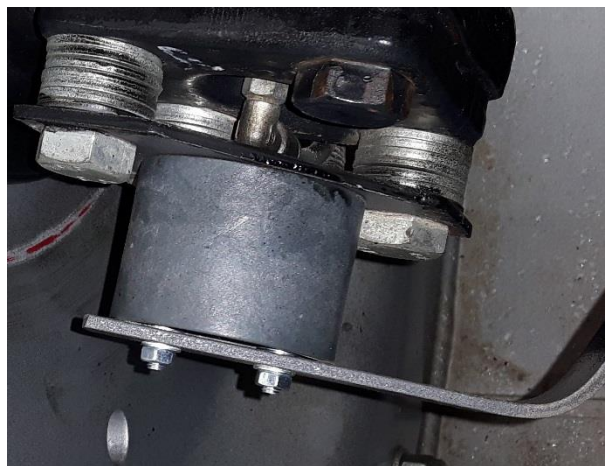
CORRECT MOUNTED WHEEL ANGLE SENSOR.
